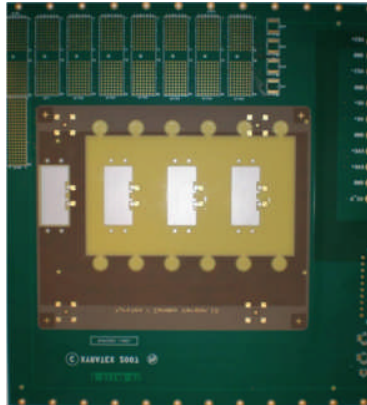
Optical PCB board waveguide interconnect. The three white rectangles are the cut-out connector sites where the daughter boards are plugged into the backplane.
